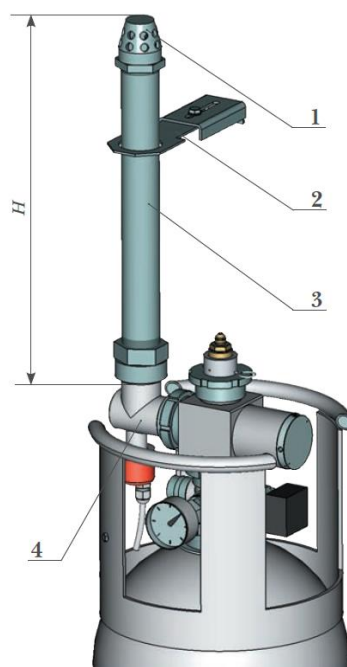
Overall view of release device YB on a module with a shut-off valve
